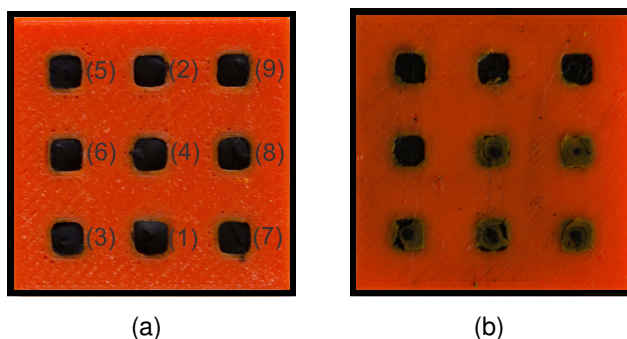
3D-printed sensor array without the wires (a) Front view, with elements array description and (b) Back View - bottom elements showing the base used to prevent the injected PANI to slide onto the build plate of the printer.
